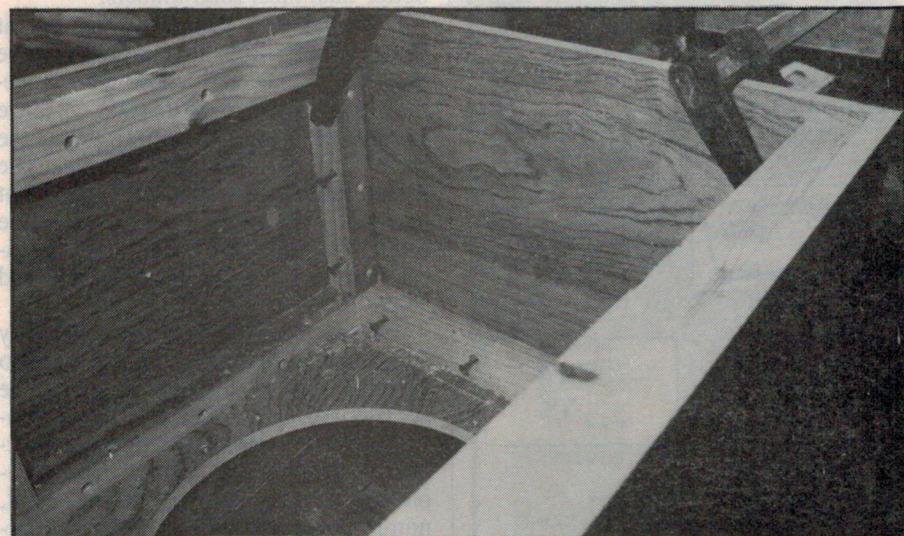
the partly assembled enclosure. Note the use of 45mm square cleats along the inside edges. The cleats should be glued and screwed into position as outlined in the text.
